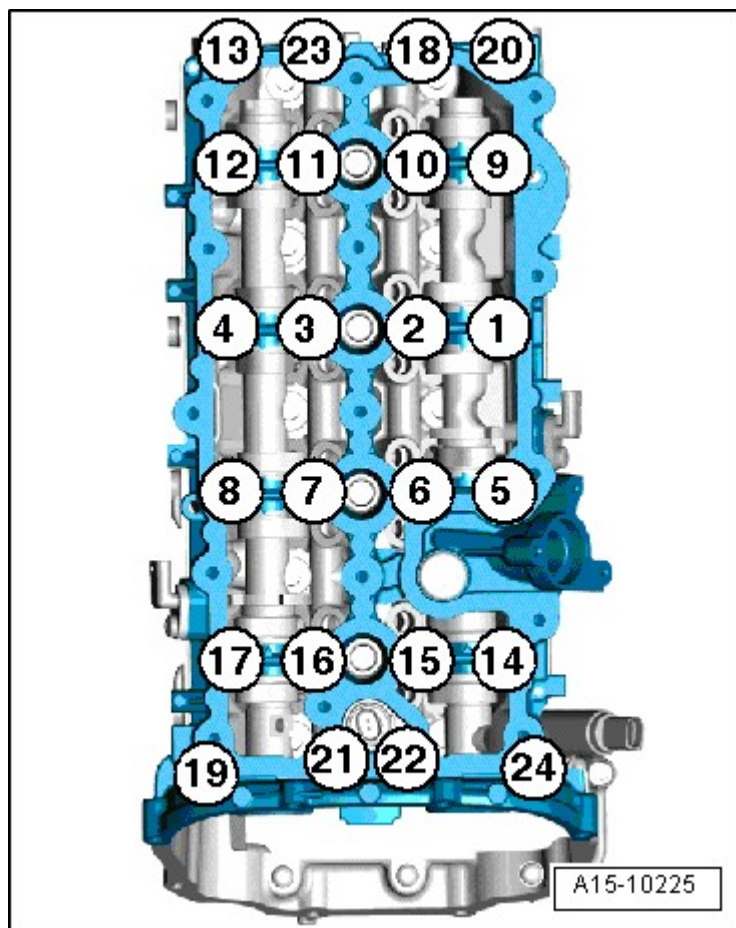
Identifying Camshaft Guide Frame Tightening Sequence
